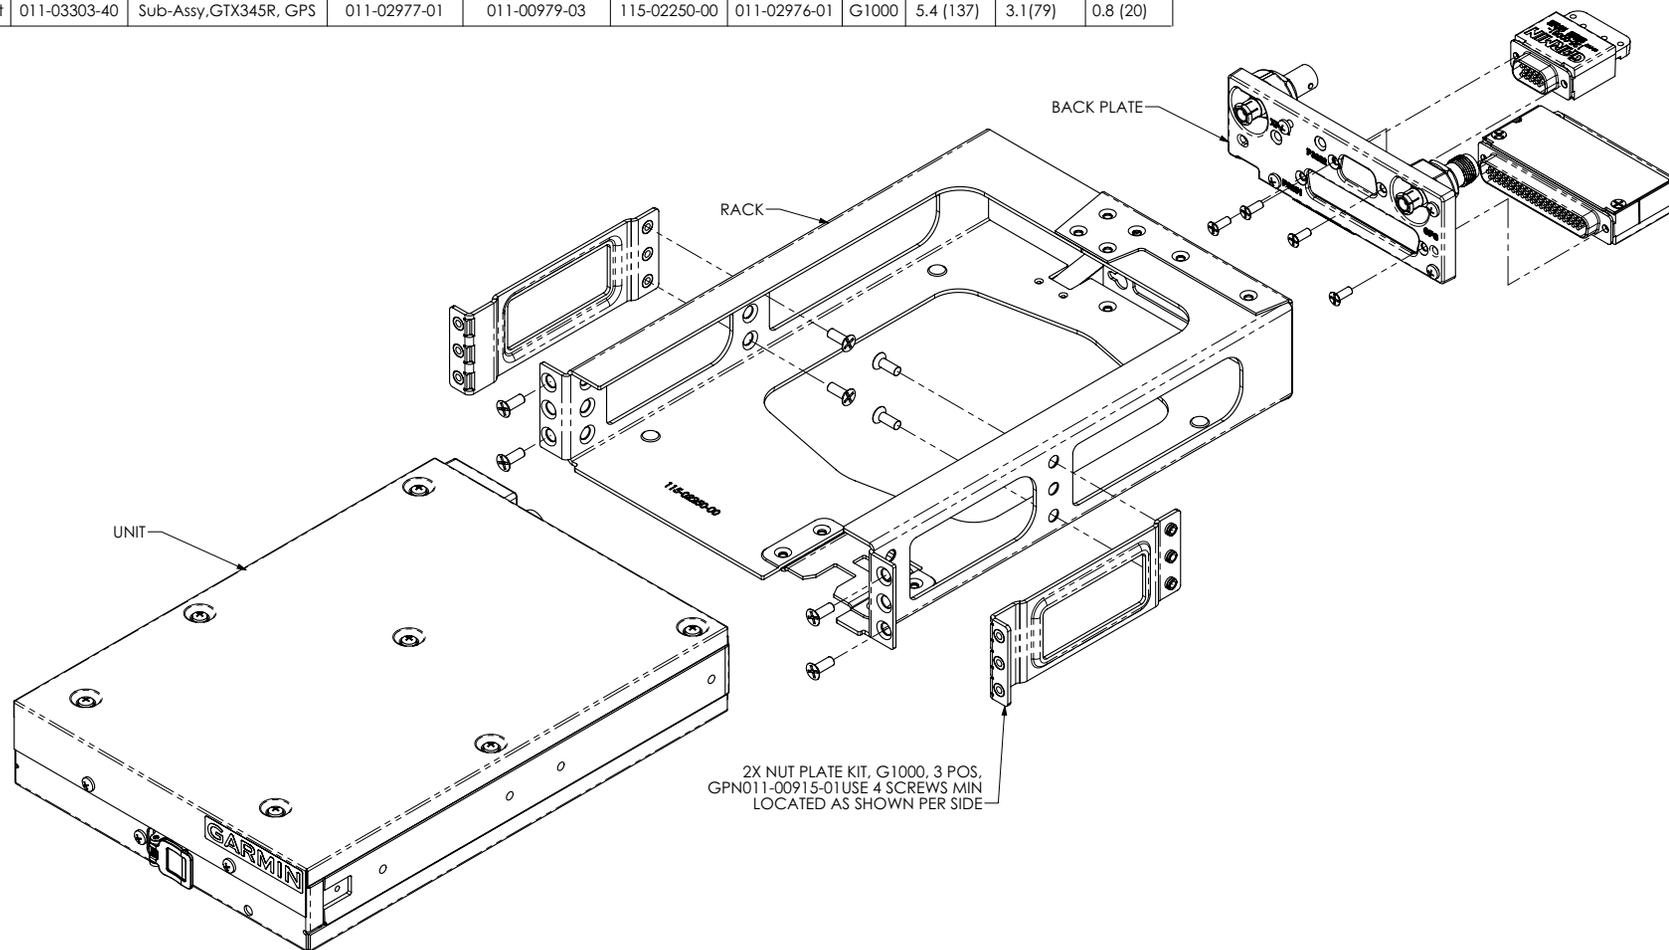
GTX 3X5 G1000 Remote Mount Assembly
